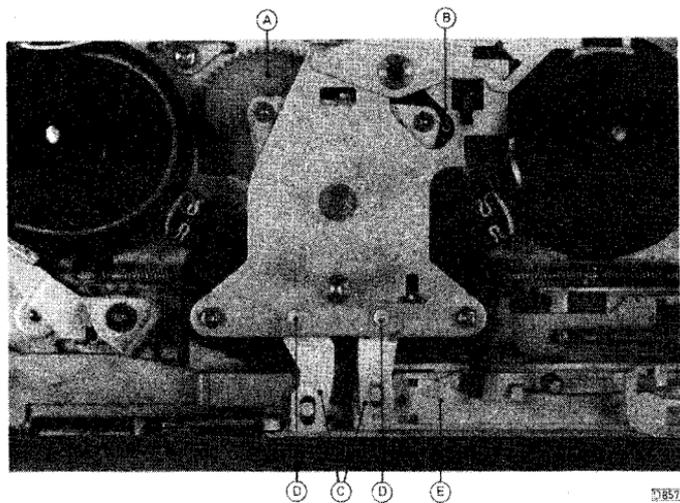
Operating levers and drive-gear assembly. Key: A reverse drive gear; B forward drive gear; C gear levers; D gear lever pivots; E slide bars/operating levers.
